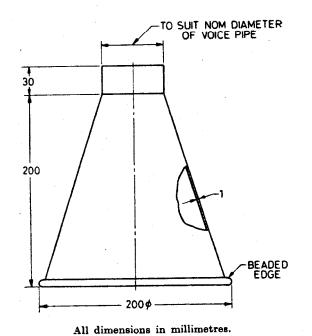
Dimensions for Voice Pipe Trumpet-Shaped Mouthpiece
